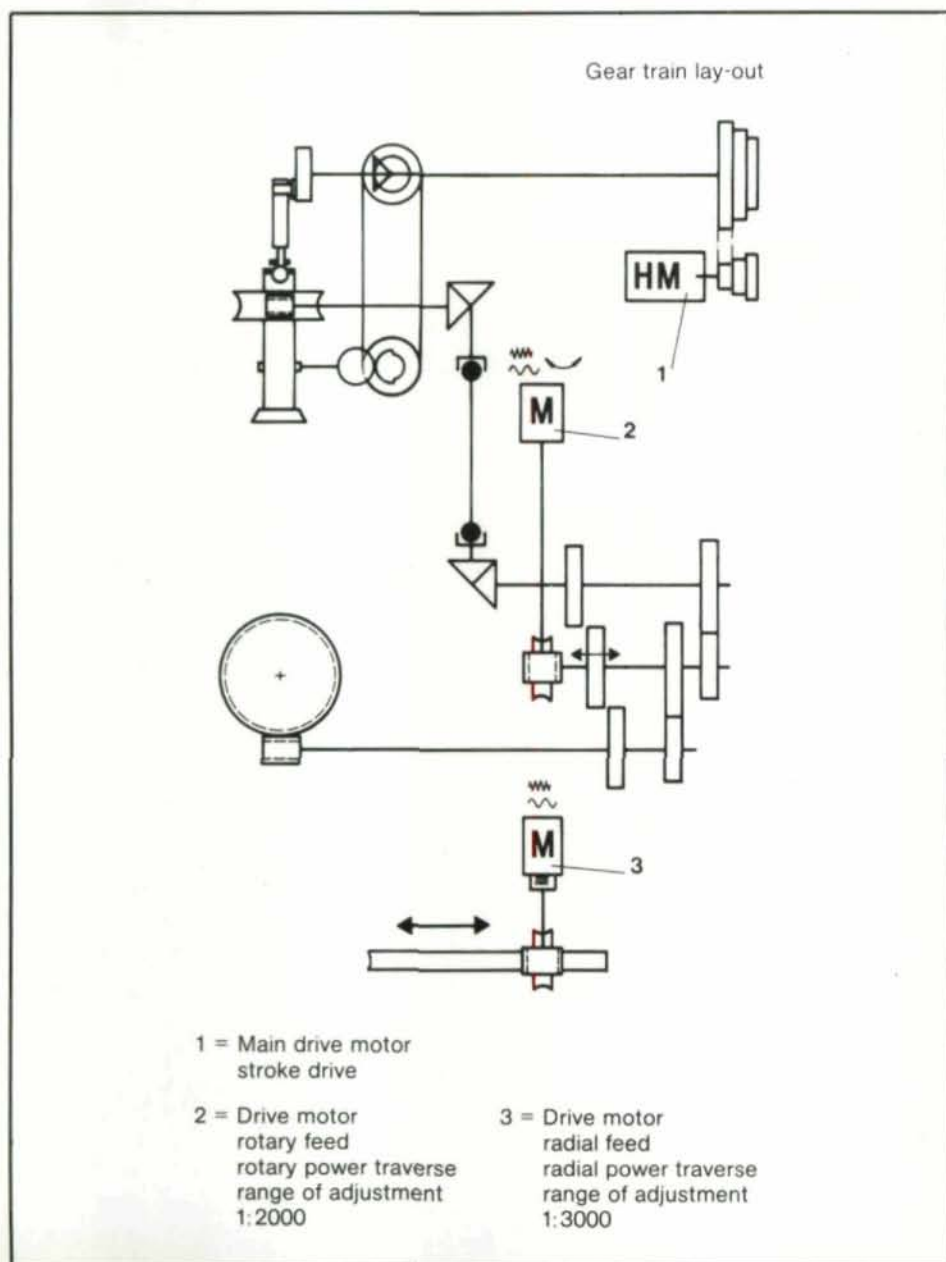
Second generation modern gear shaper with independent drive trains.
